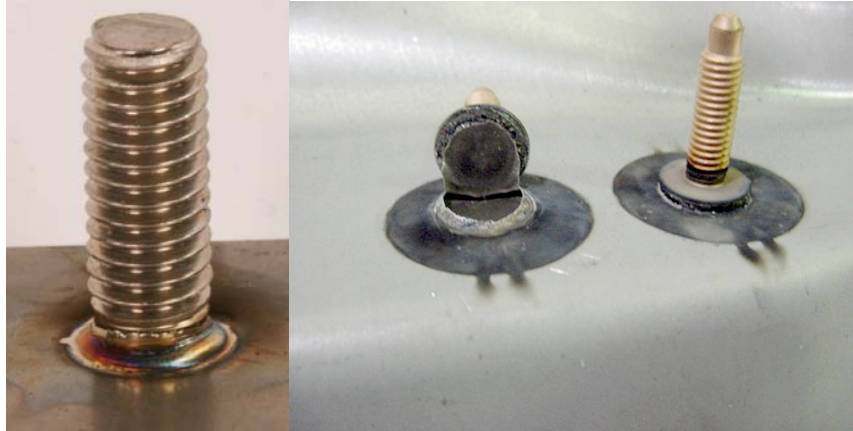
9.5mm diameter stainless stud short cycle welded without ferrule (left) and W-top welded to laminated steel (right)
